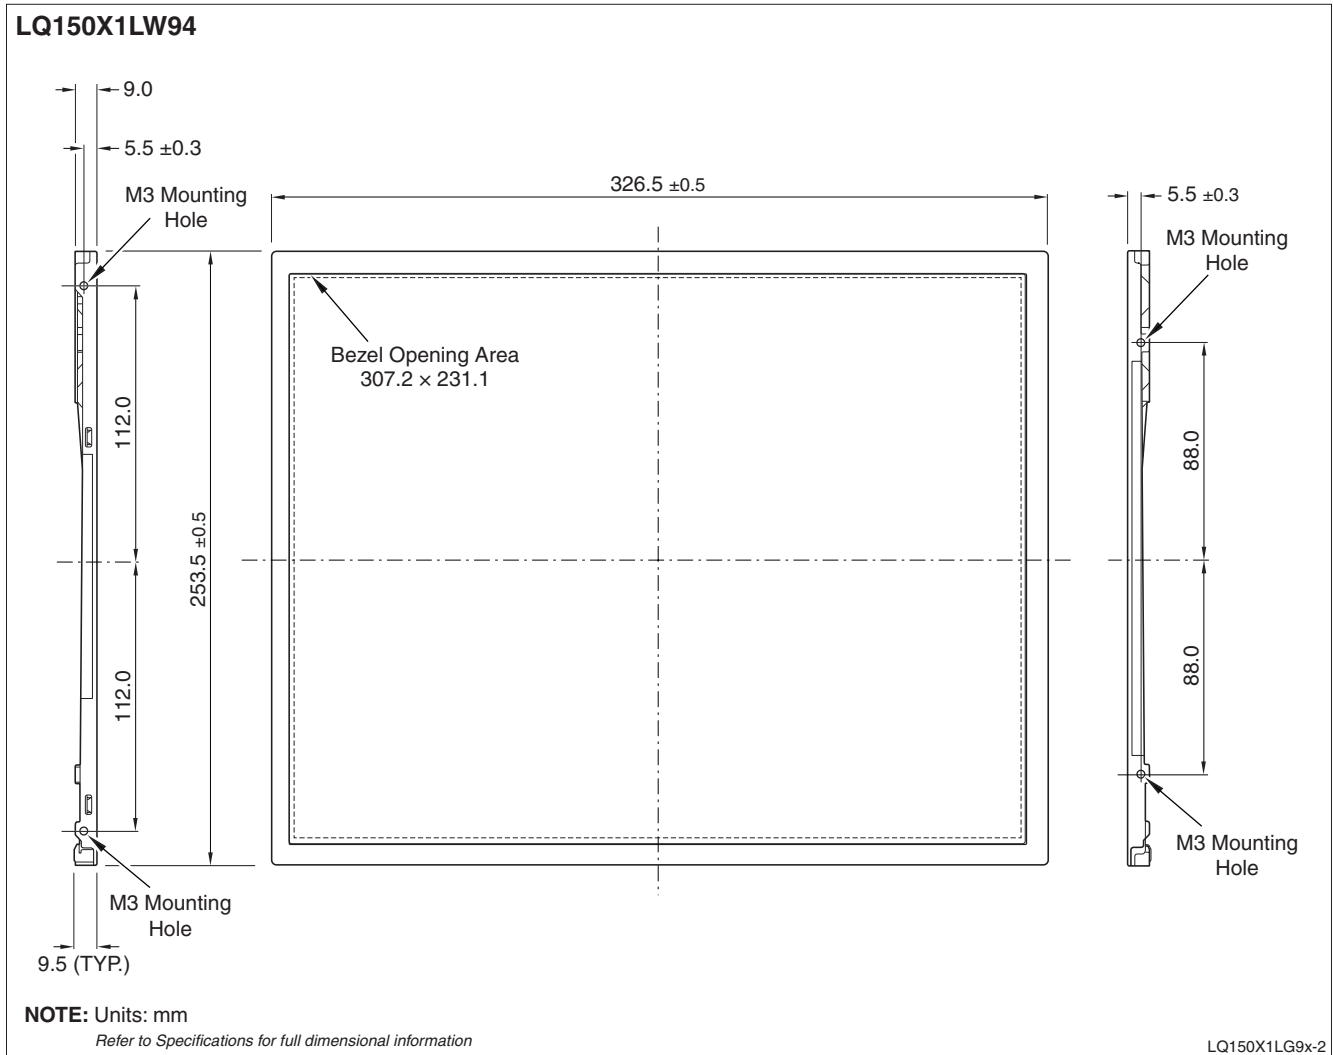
Mounting Dimensions for LQ150X1LW94 (Upgrade)
